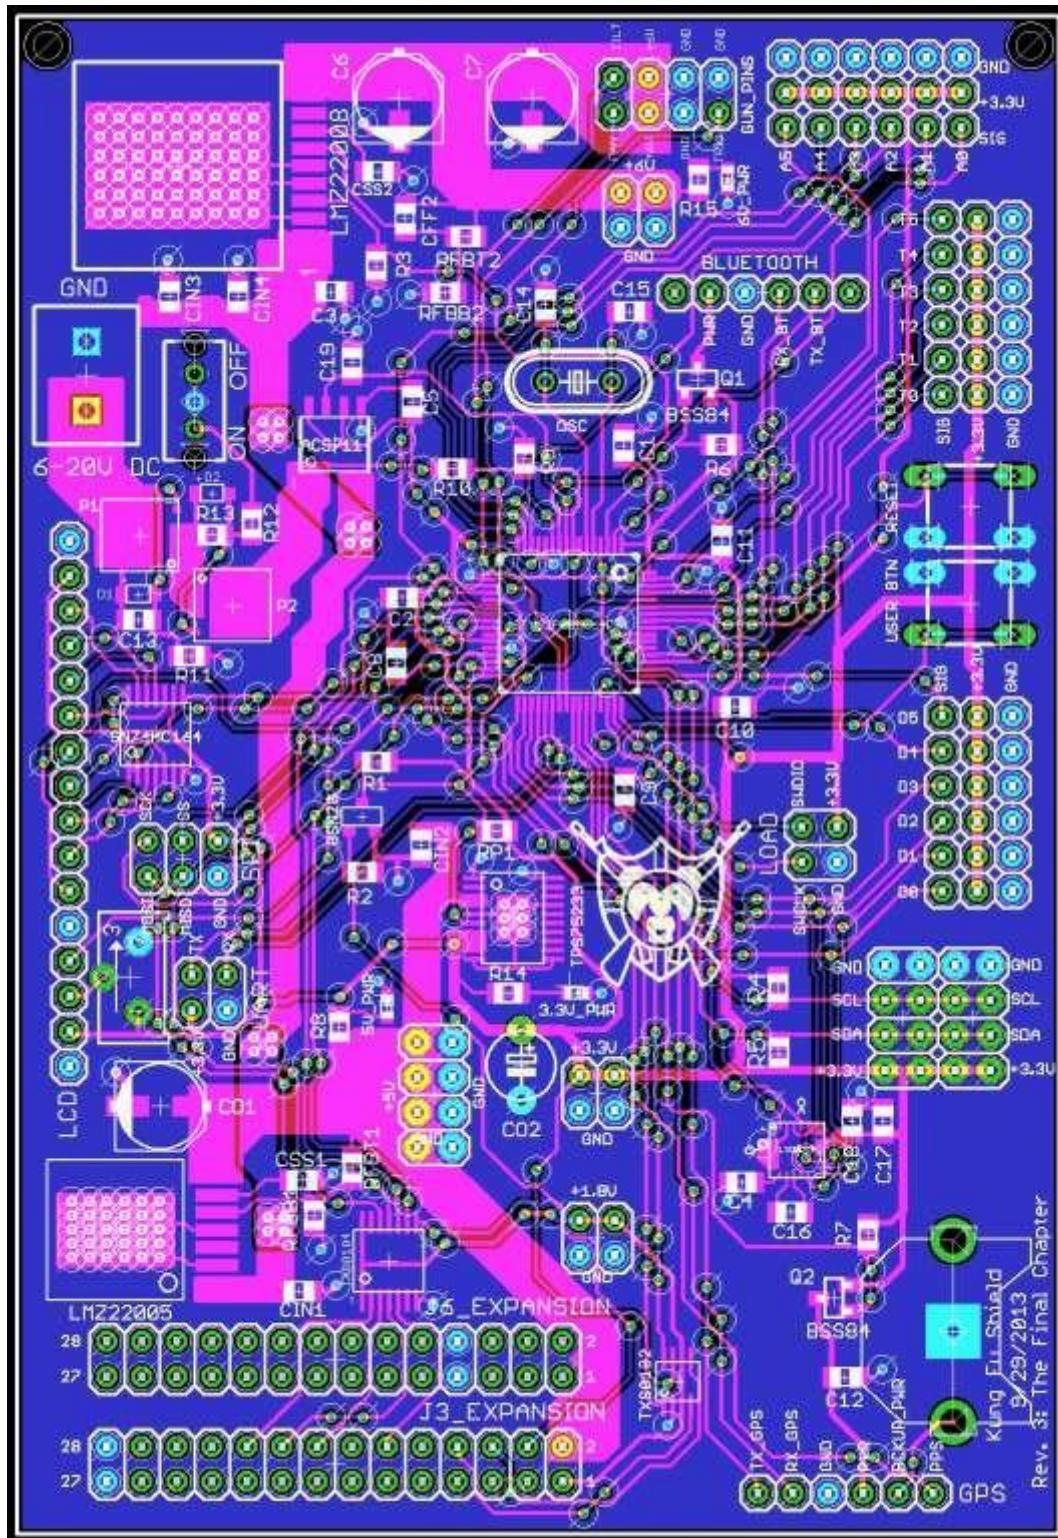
PCB layout in EAGLE for the Kung Fu Shield.
